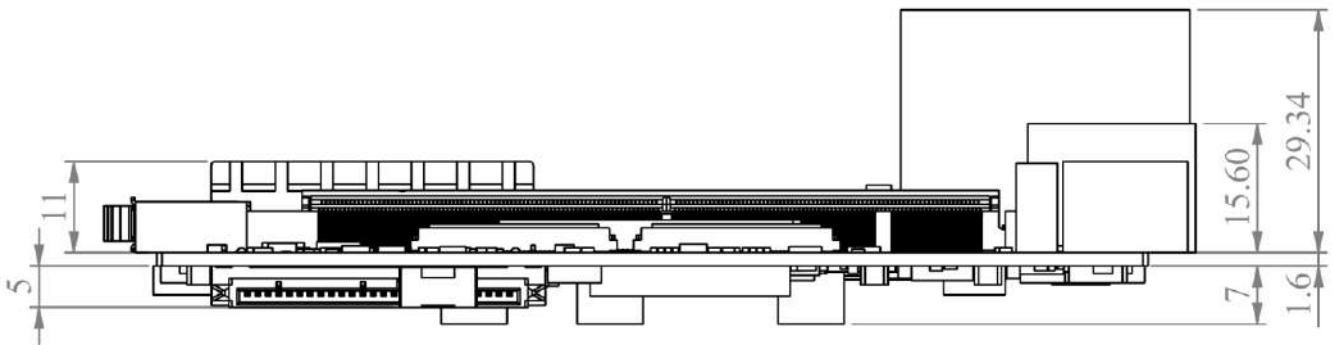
Mechanical dimension of i.MX8M Q/QL/D SMARC Carrier Board - Side View
